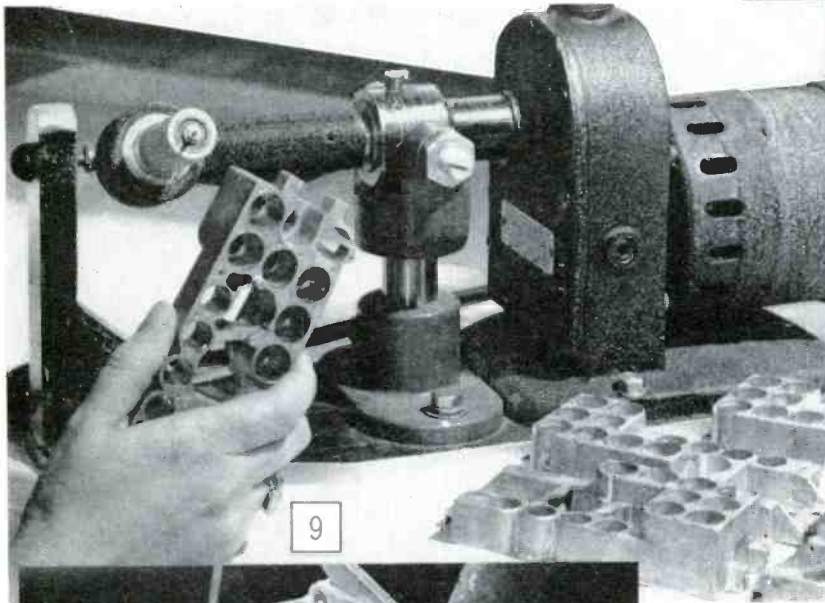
POWER-DRIVEN THREAD GAUGE IS USED TO INSPECT EACH OF 36 THREADED HOLES. FIG. 10. SOCKETS ARE PRESSED INTO STEEL CHASSIS, ON WHICH TUBULAR CONDENSERS ARE ALREADY SOLDERED. FIG. 13. ASSEMBLY COMPRISES A DIE-CAST ALUMINUM CHASSIS, AND TWO CHASSIS FORMED OF SHEET STEEL
